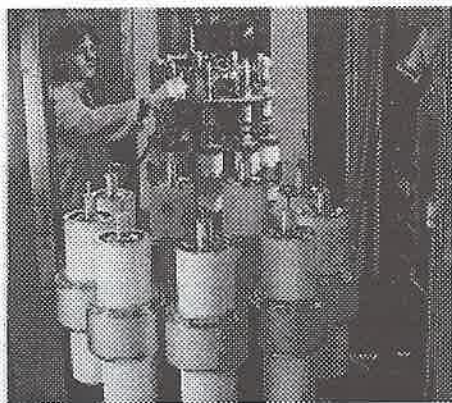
Manifold Pumping at ALSTOM, Ulm, Germany
